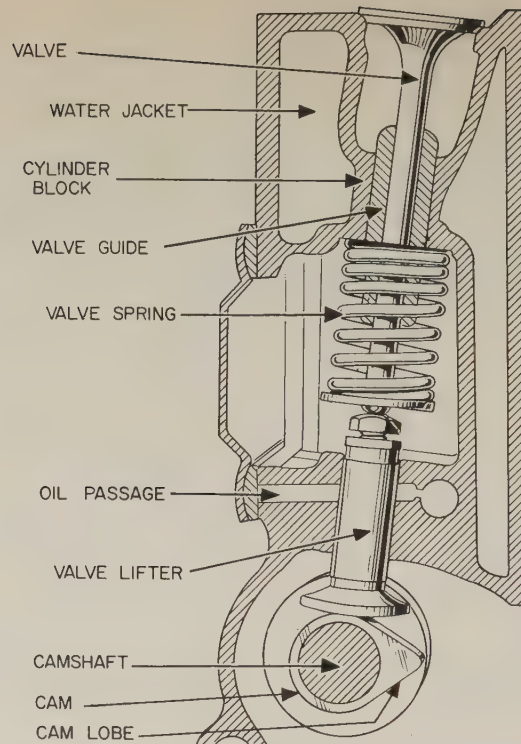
Valve mechanism used in an L-head engine. The valve is raised up off its seat with every camshaft rotation.
